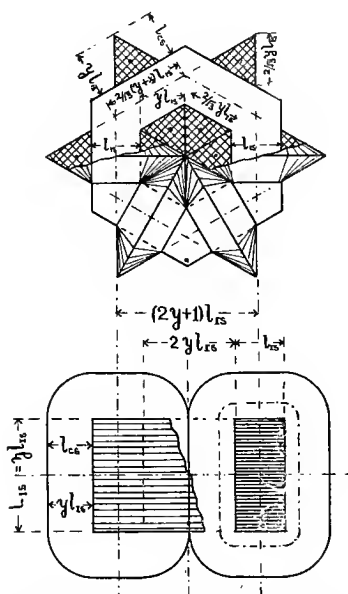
Hexagonal Ring Transformer with Rectangular Coils.
